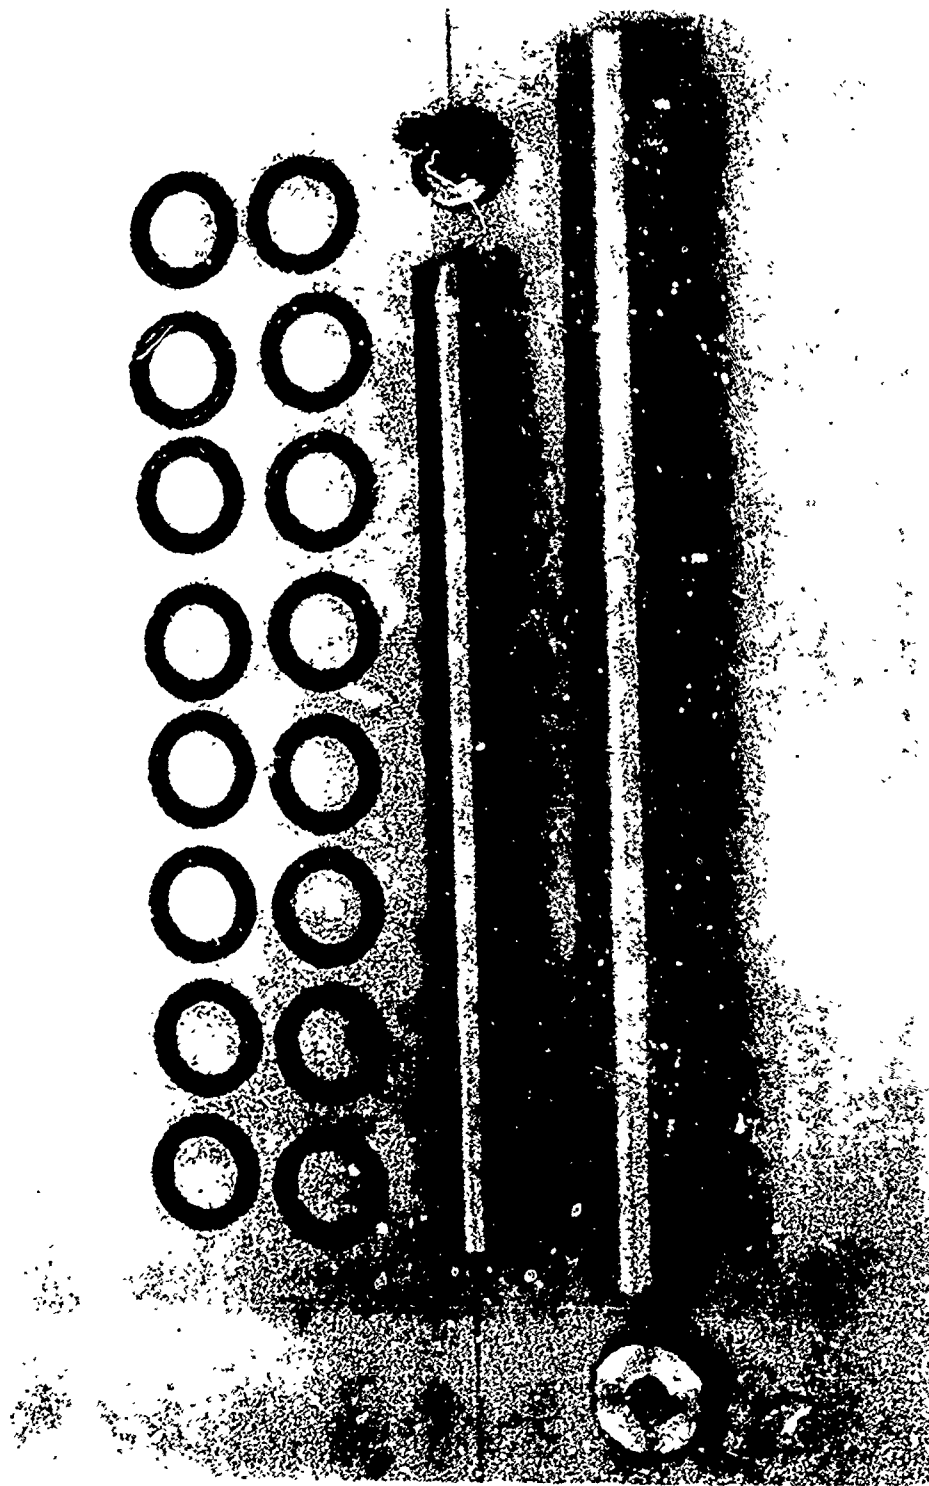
Disassembled Rolling Ring Strut Components (MRI).
